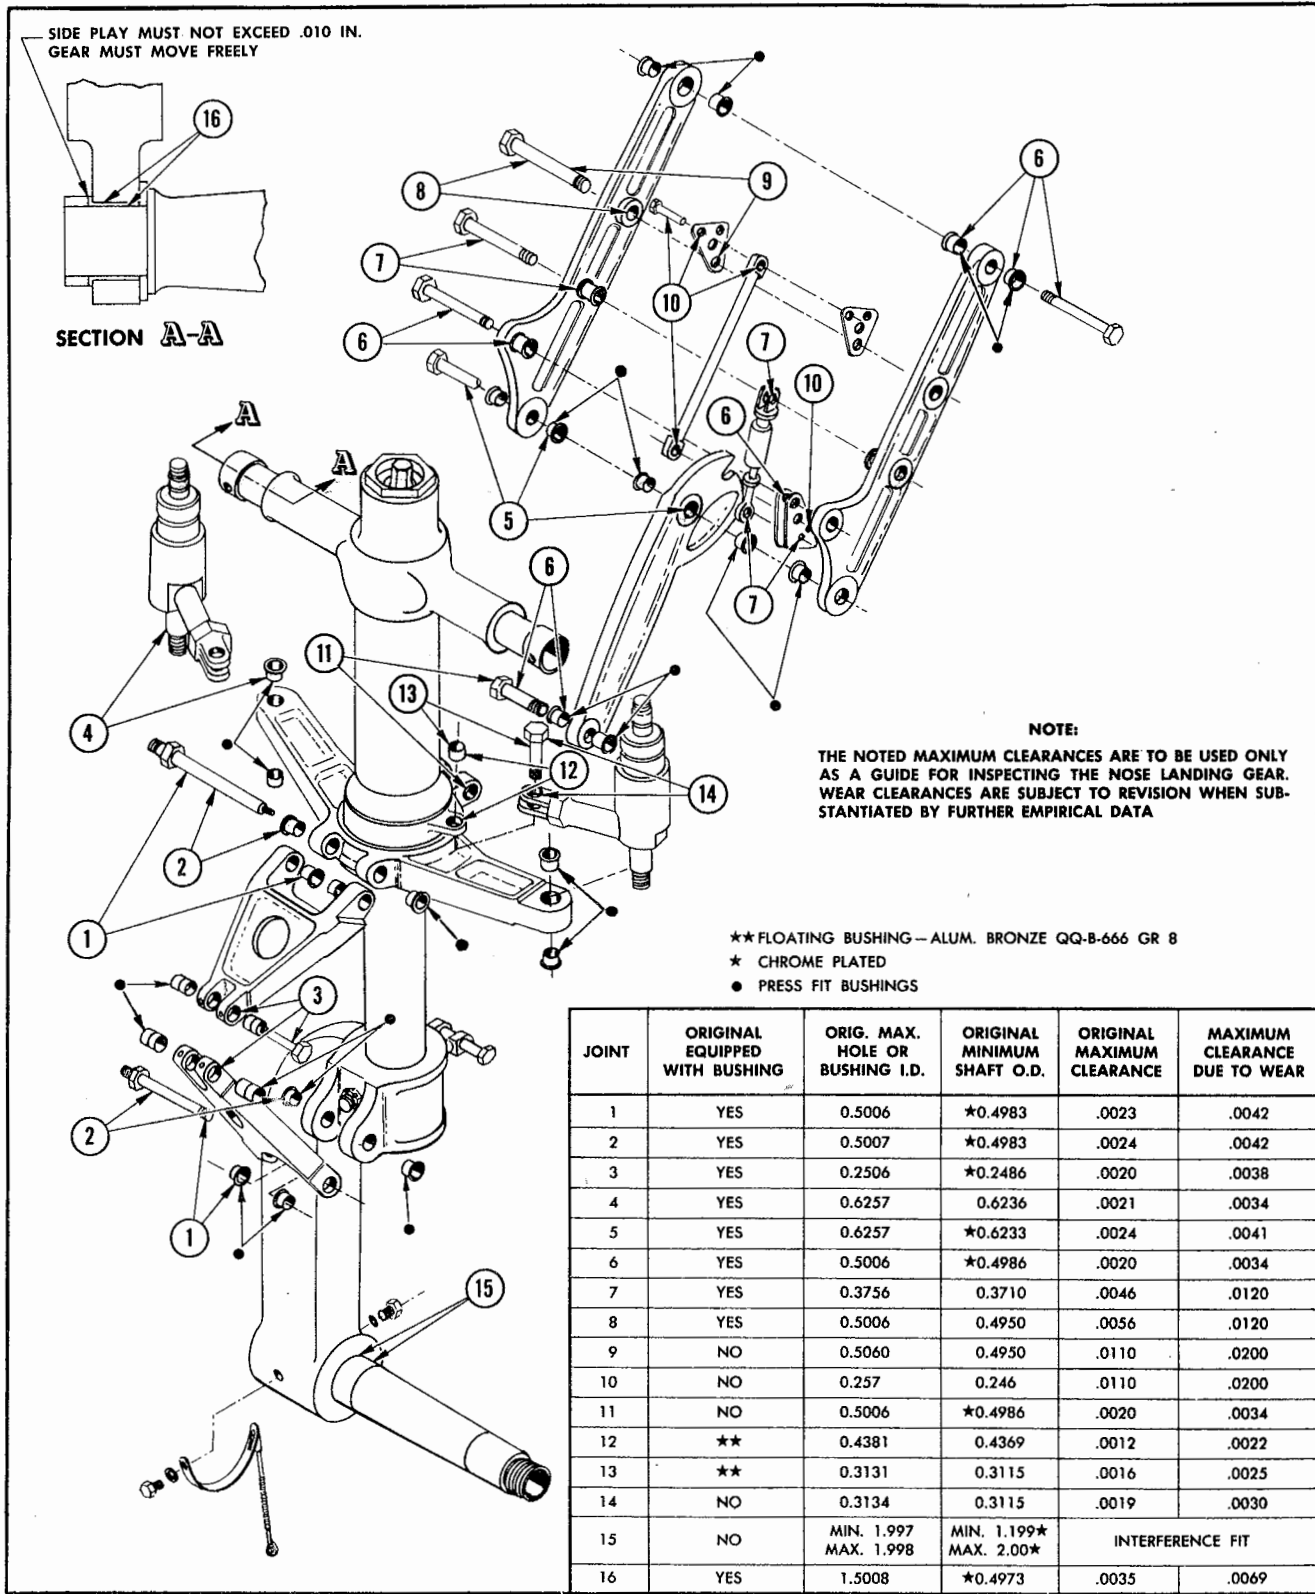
D — Allowable Wear Tolerances, Nose Landing Gear
